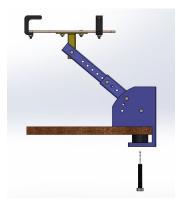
Exploded view of how to connect arms, base and laptop platform together
